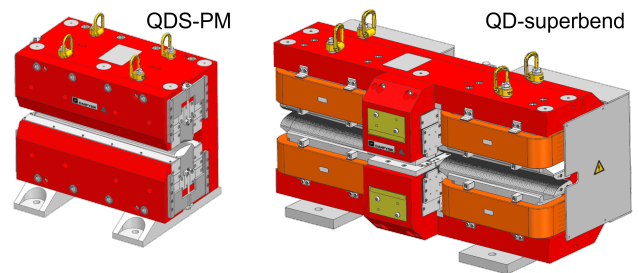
View of the two ALBA II magnet prototypes which incorporate PM magnet blocks, currently being manufactured by Danfysik.
